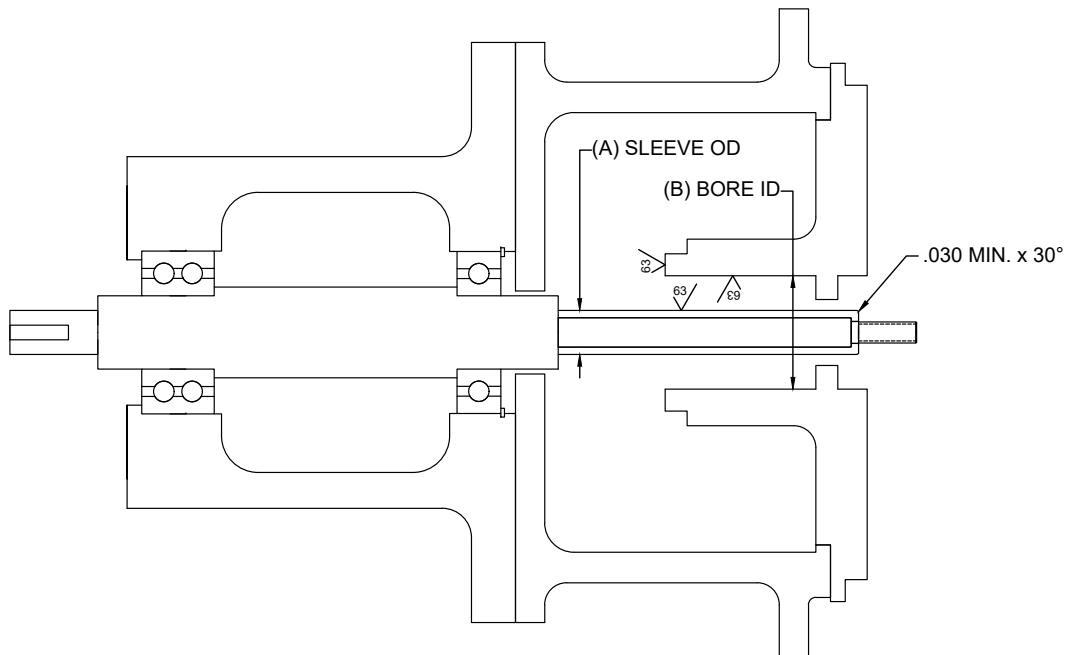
Surface finish and chamfer locations. Fully assembled pump without seal.
